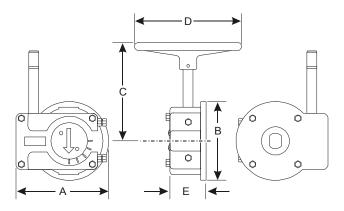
Dimensions for Gear-Operated Manual Hand Wheels (Refer to Table 11.)
